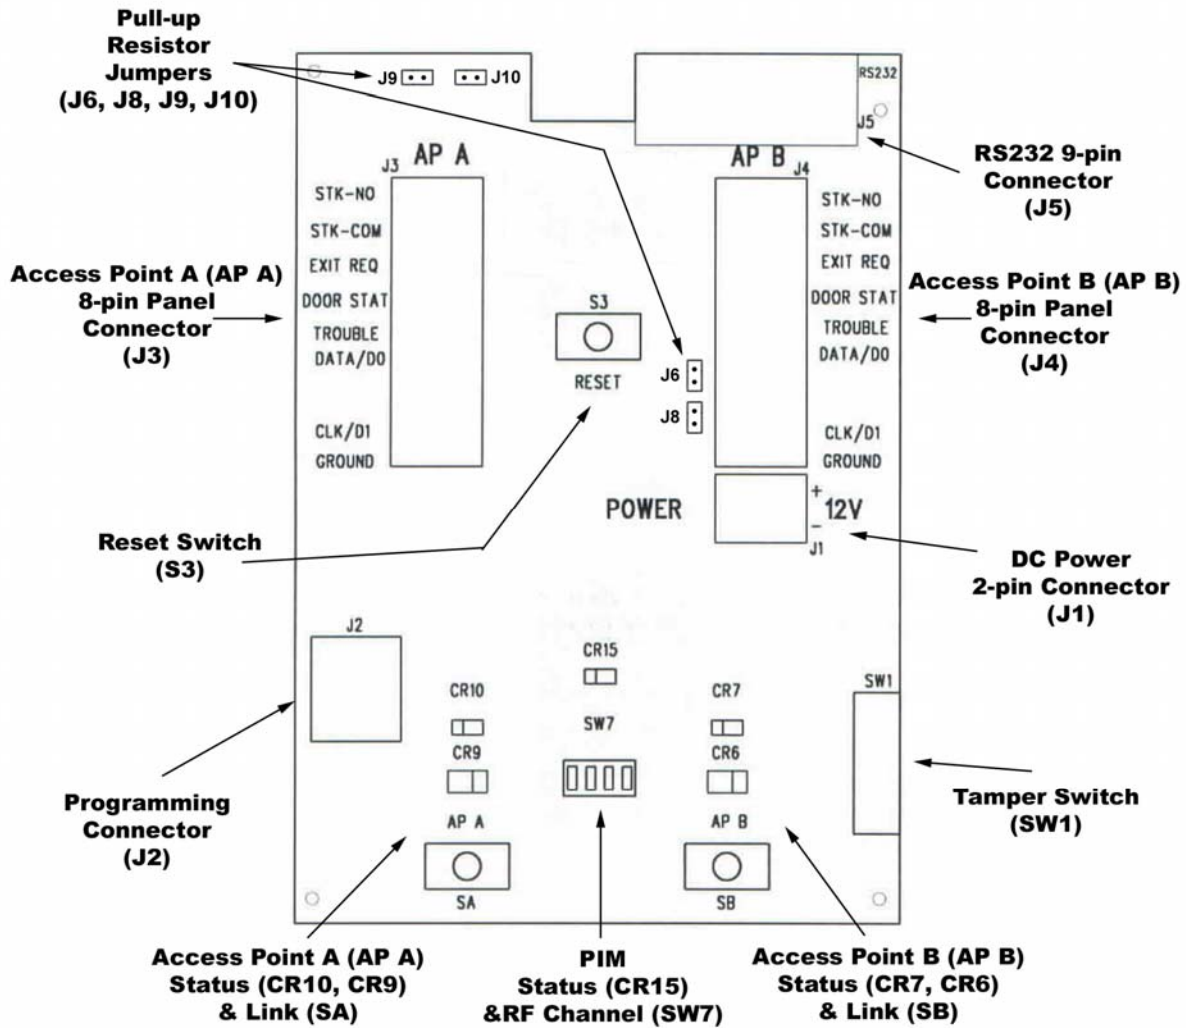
RS232 PIM & PIME Printed Circuit Board (PCB)
